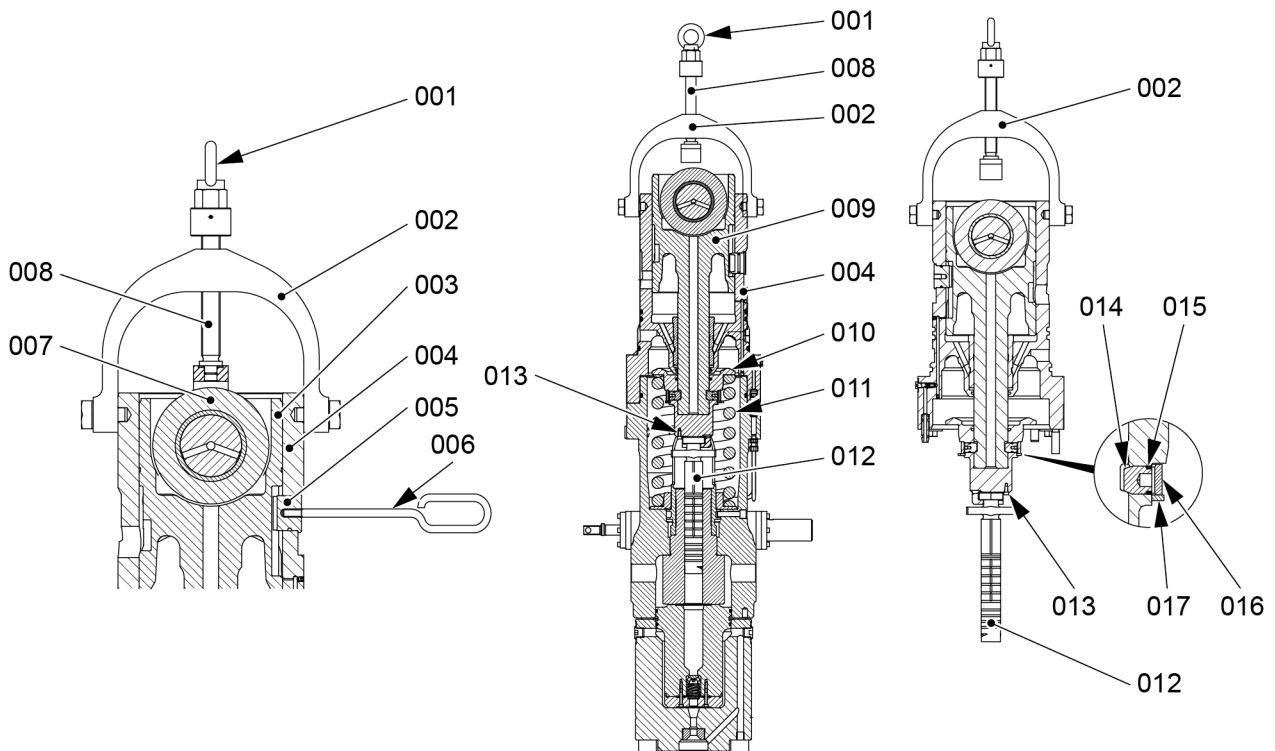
Fuel pump (X4) - Preparation before disassemble
